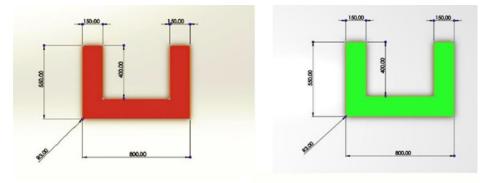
Castle Dimensions for Dribbling (in millimetres)
